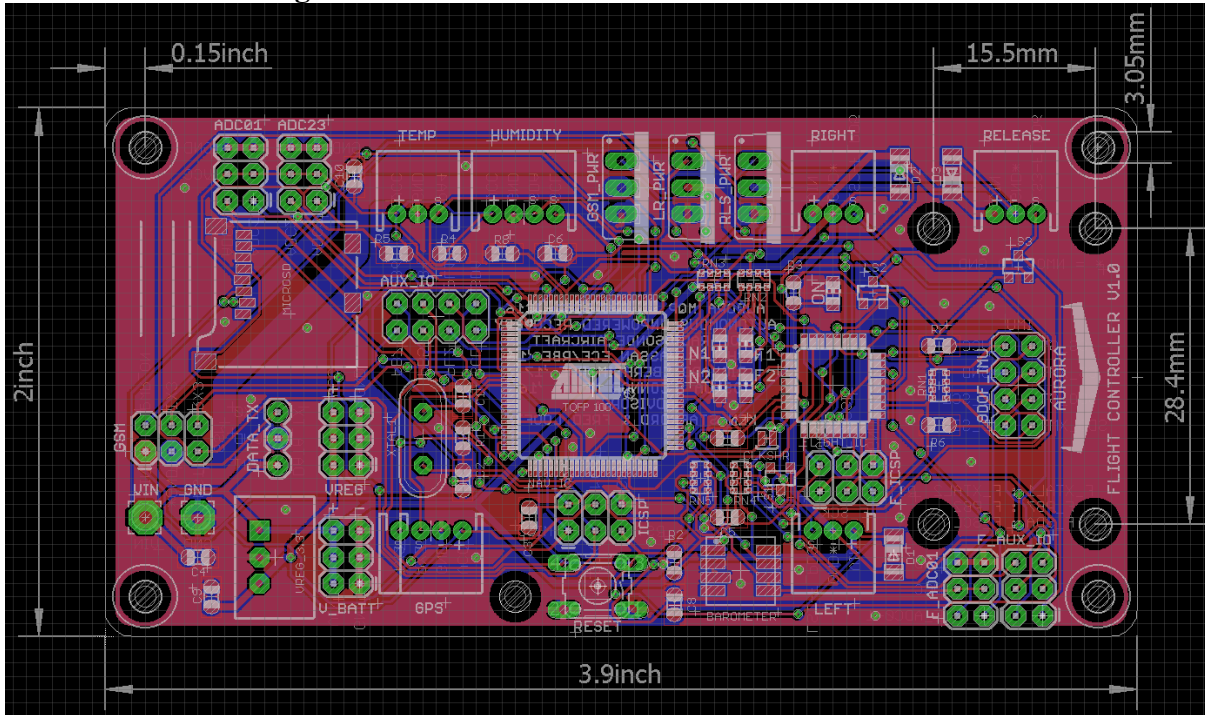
EAGLE Board View of Flight Controller with PCB Dimensions
